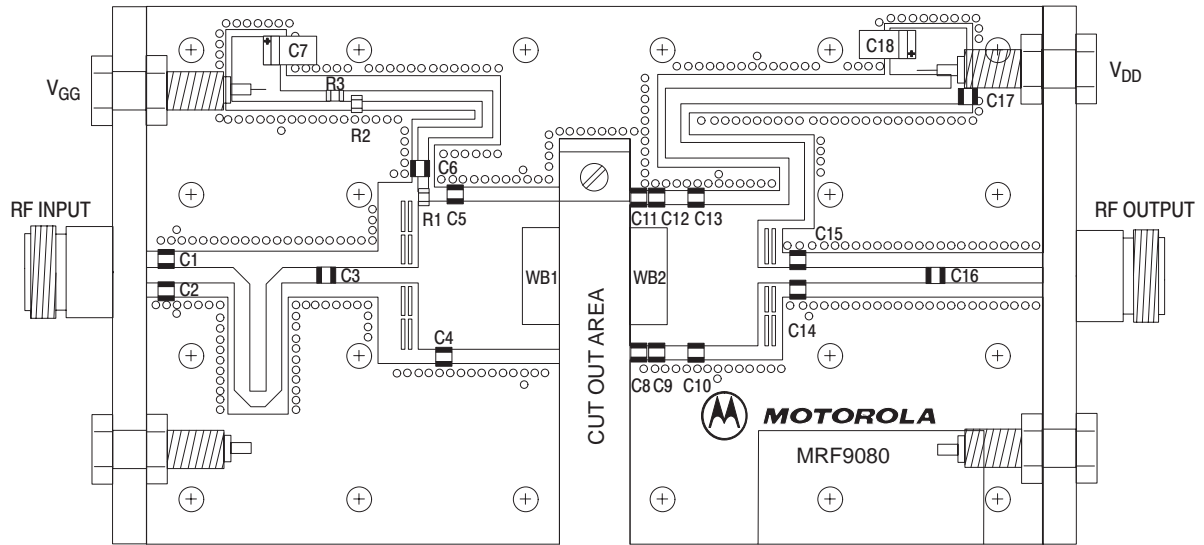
Broadband GSM 900 Test Circuit Component Layout
